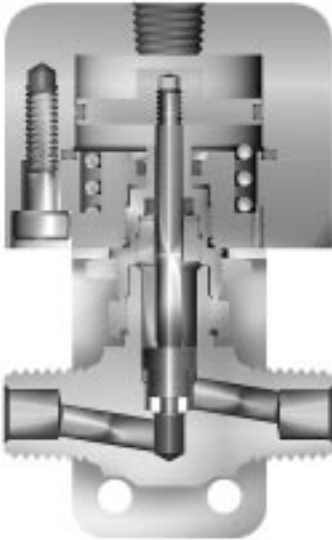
VQ-11AO Series Actuated Valve Cross Sectional View
